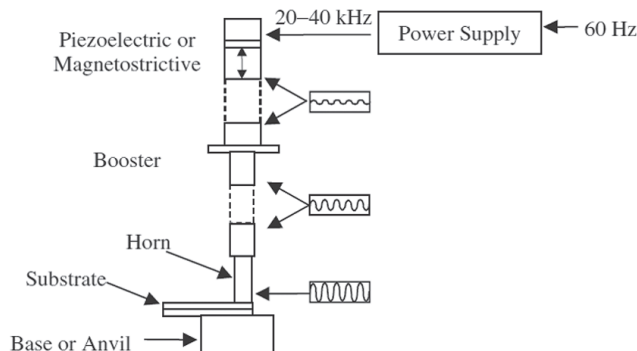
Schematic of an ultrasonic welding machine (Yousefpour *et al.*, 2004; Ageorges *et al.*, 2001; Ageorges *et al.*, 2000).
